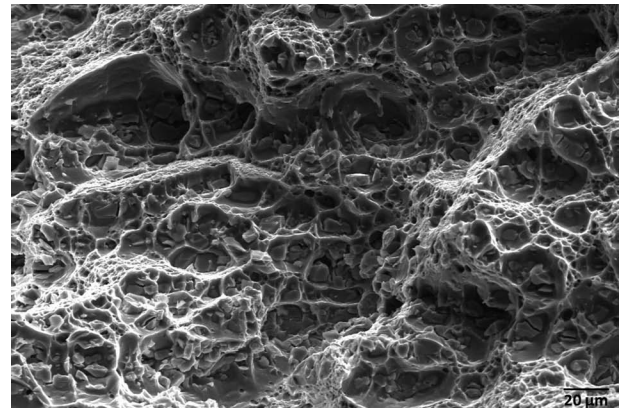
Higher magnified image of the fracture surface shown in Fig. 109. Note the presence of dimples throughout the fracture surface
